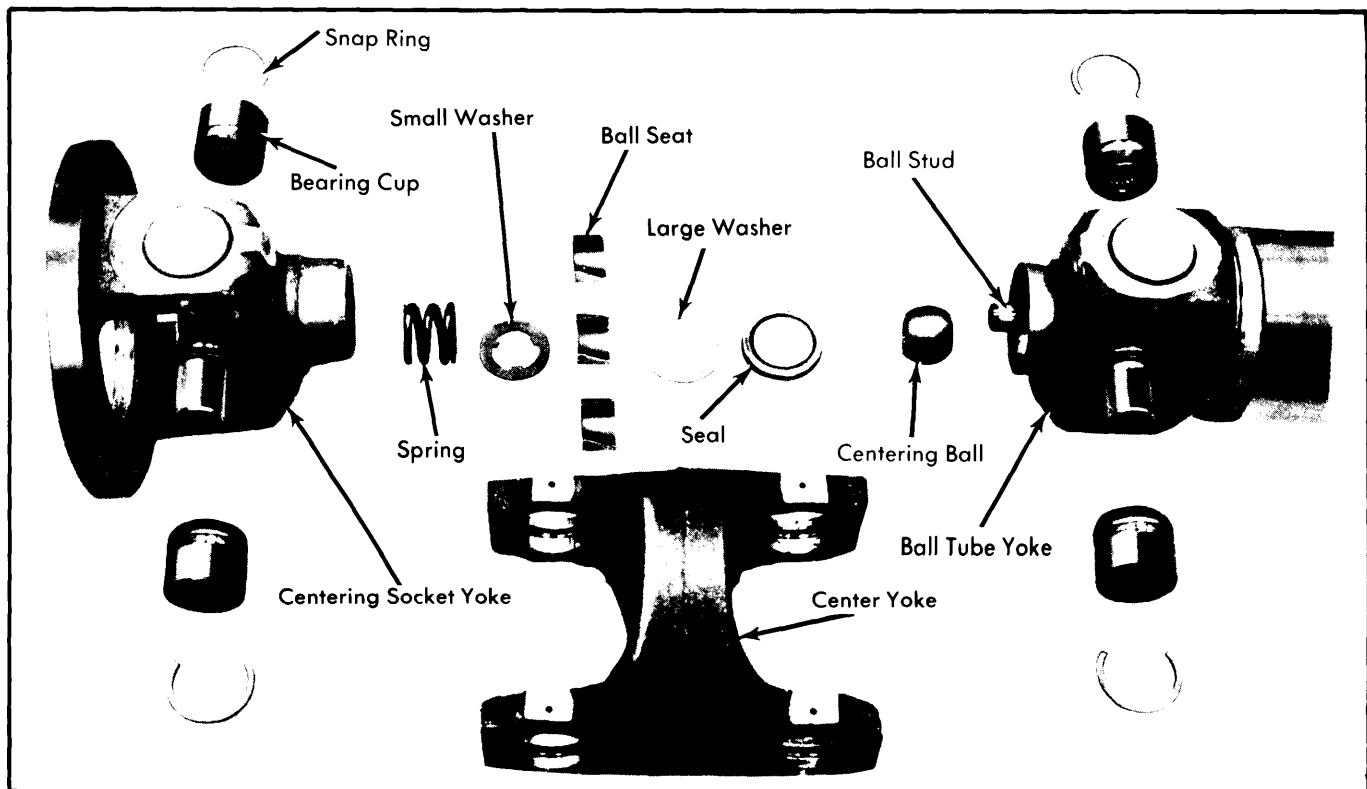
Exploded View of General Motors and Jeep Constant Velocity Type Universal Joint
